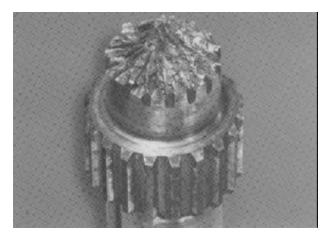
Input Shaft Torsional Fatigue Failure
